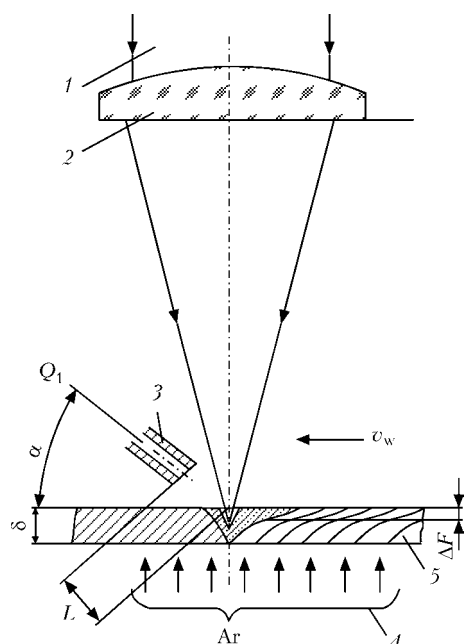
Scheme of laser welding with a shielding gas fed ahead of the welding head: 1 — laser beam; 2 — focusing objective; 3 — nozzle for shielding gas feeding; 4 — weld root shielding; 5 — sample; Q_1 — shielding gas flow rate; v_w — welding speed; ΔF — focus deepening
